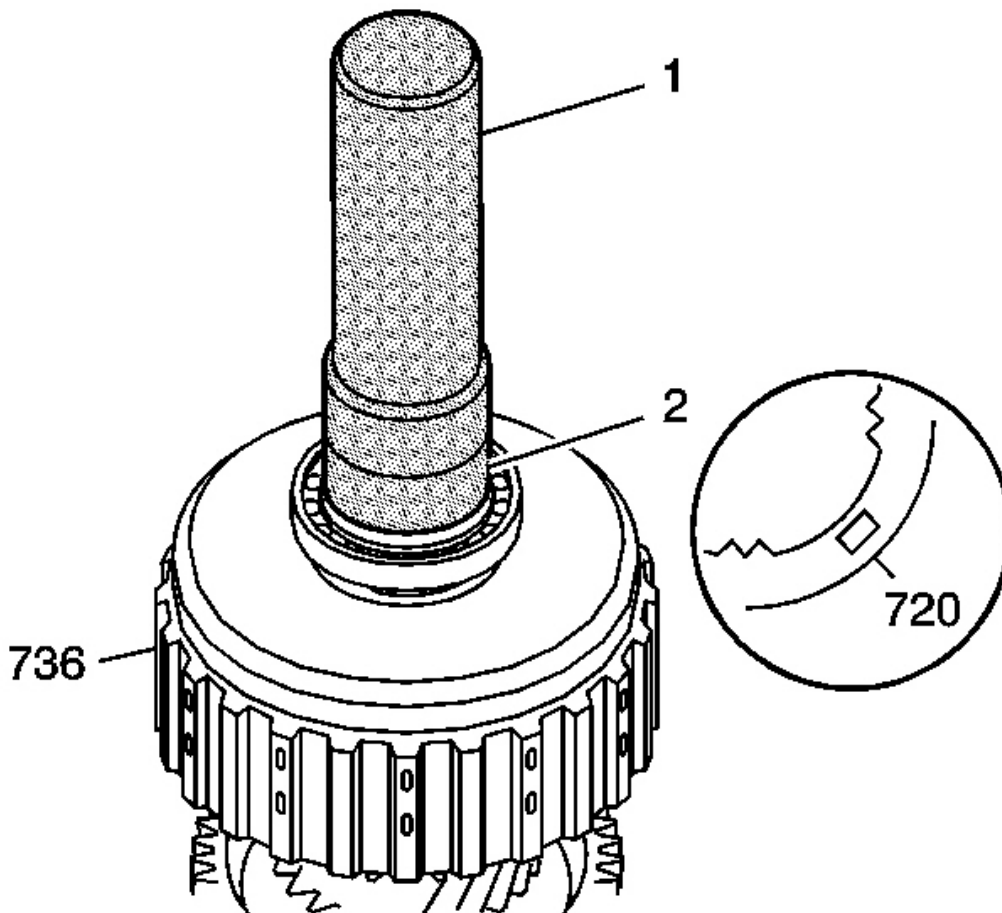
Installing 1st/2nd Clutch Shaft Retaining Nut Washer Using DT 46509 & DT 46418
